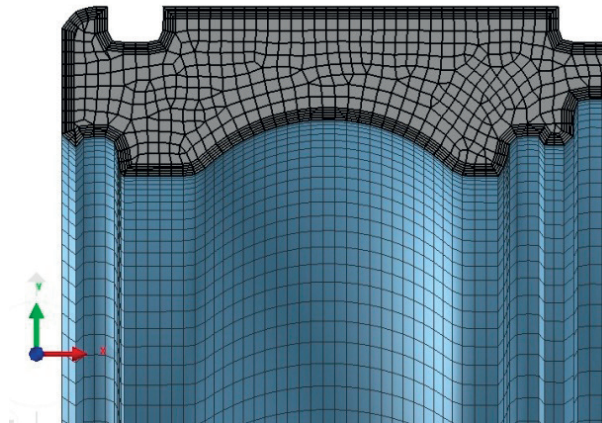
Cross section of the outer ring and the representation of the surface layer
